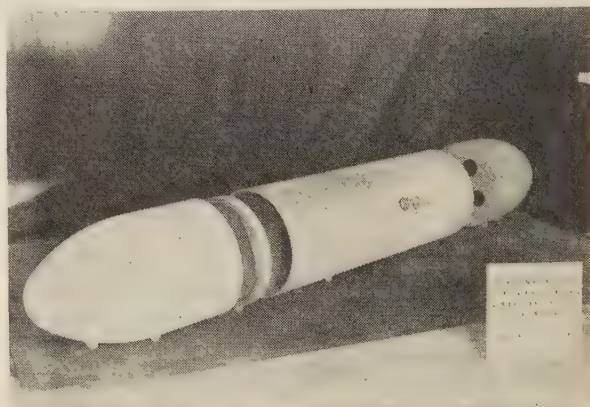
ASSEMBLY OF CENTER SECTION, DOUBLER RINGS, AND LAMINATED END SECTIONS OF FUEL TANK
